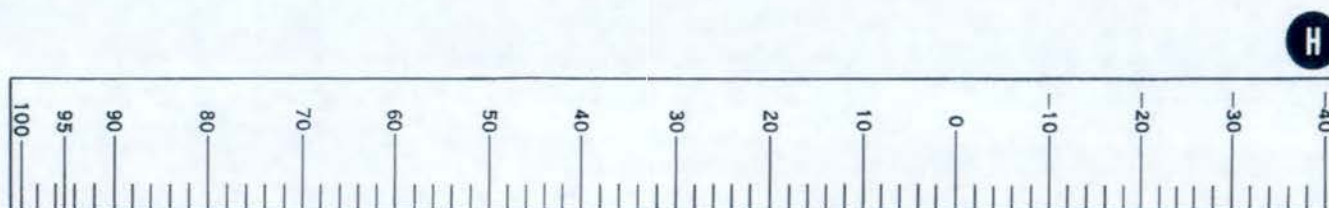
Blade Angle Graduation Template; H Shanks -Actual Size
